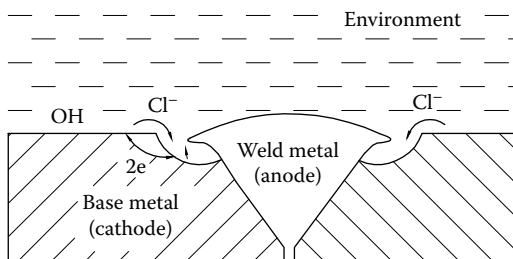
Crevice corrosion due to weld defect.
